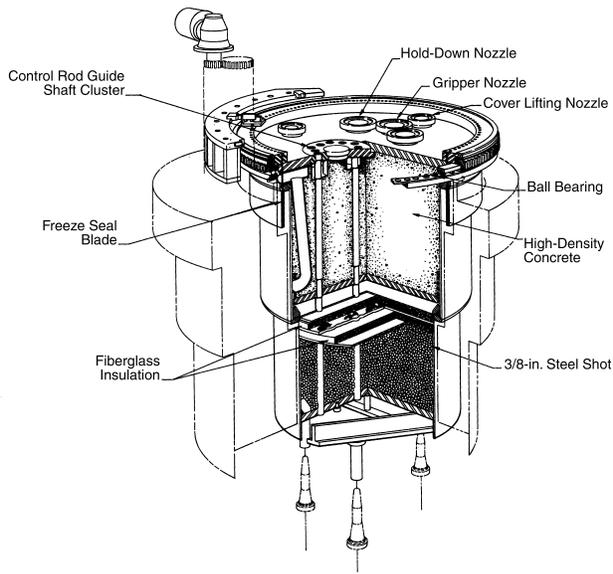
SMALL ROTATING SHIELD PLUG.
